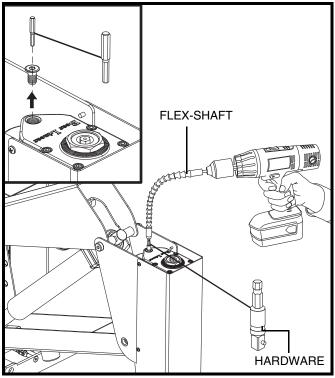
A. Raise Or Lower The Platform (Remove Screw To Expose The Adjustment Opening) Backpacker MV ONLY
